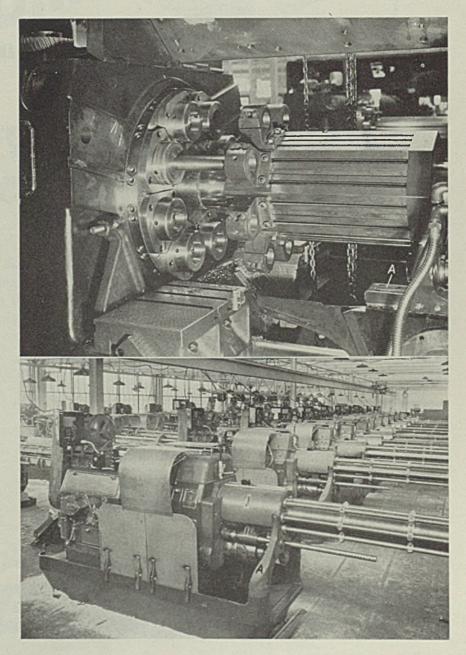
(Upper)—Tool holders must be bored while in place on the tool slide. This is done from the work spindles after the tool holders have been accurately aligned with vital surfaces of the end-tool slide and cross slides, thus assuring exact axial alignment. Fig. 4. (Lower)—In this line the machines are tooled up and given a final running test on parts actually to be placed in production
